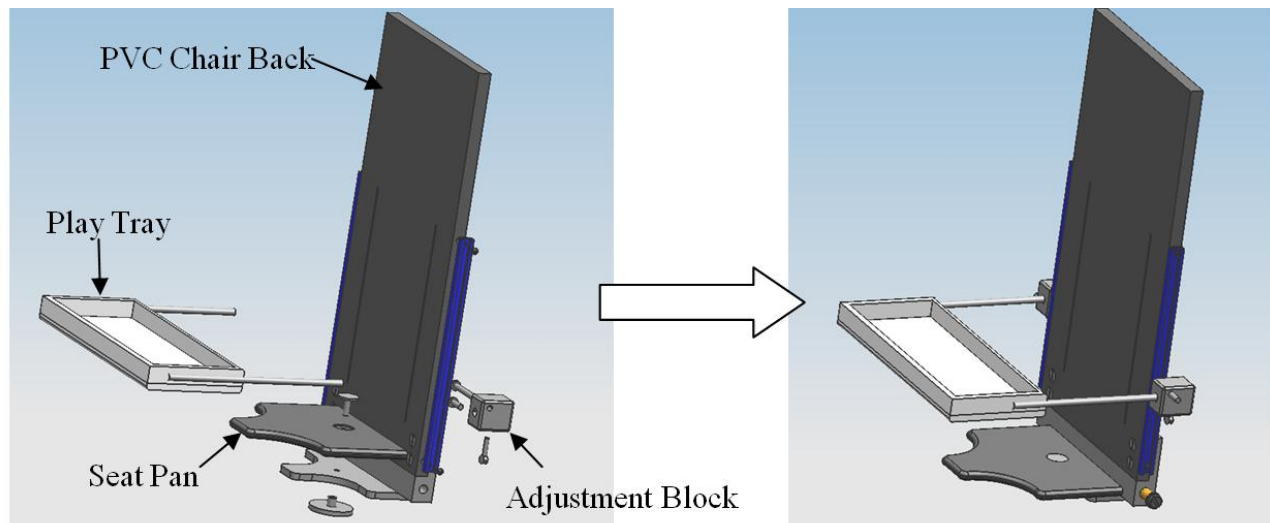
Exploded to assembled view of tray, tray adjustment system, and seat pan.
